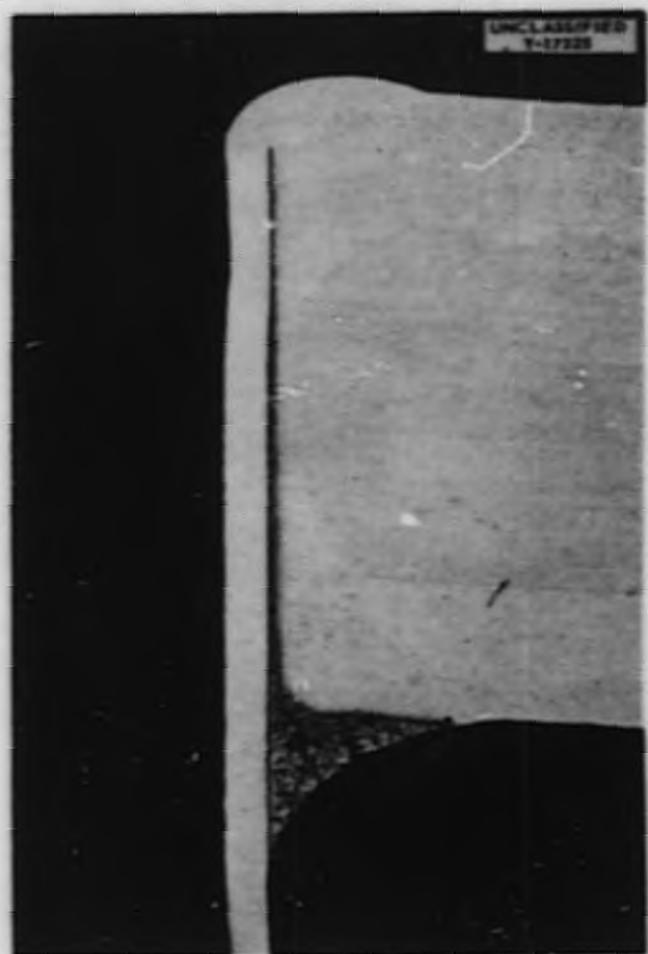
Photomicrograph of a Typical Back-Brazed Tube-to-Header Weld. Etchant: oxalic acid, 12X. Reduced 14.5%.
